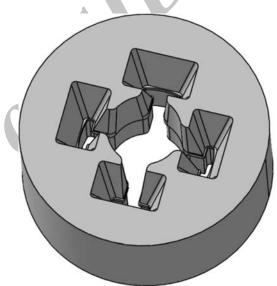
Top view of the die with feeder in thinner sections and variable bearing length
